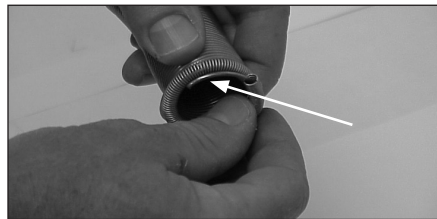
Thread Inner Spring until 1 inch of the Corona Ring protrudes.
